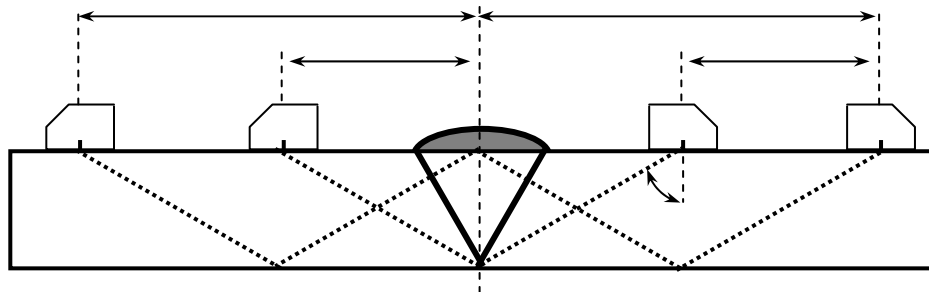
Inspection of weld with angle beam probe.
